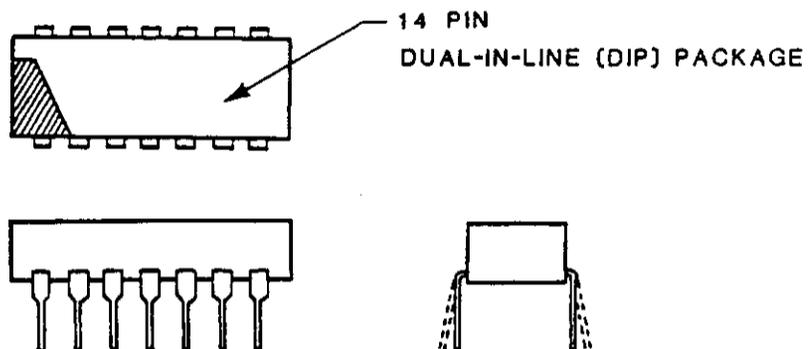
Outline drawing of a style RZ010 package configuration.
